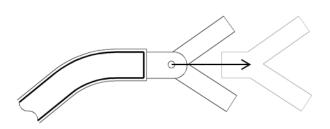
The basic concept behind the chosen design. The shaft internal components will be encapsulated, and the grasper will be removable so that it can be interchanged and cleaned, or disposed of separately.
